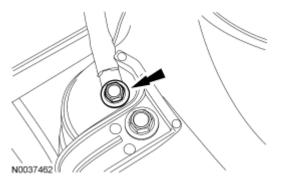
Locating Ground Wire And Bolt Courtesy of FORD MOTOR CO.
